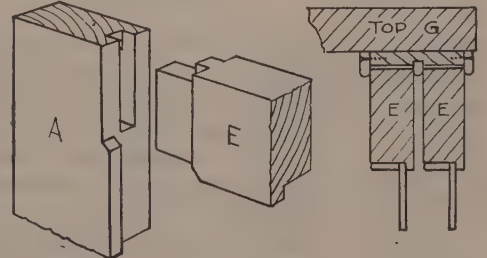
DOOR JOINT. FIG. 6.—SLIDING DOORS.
